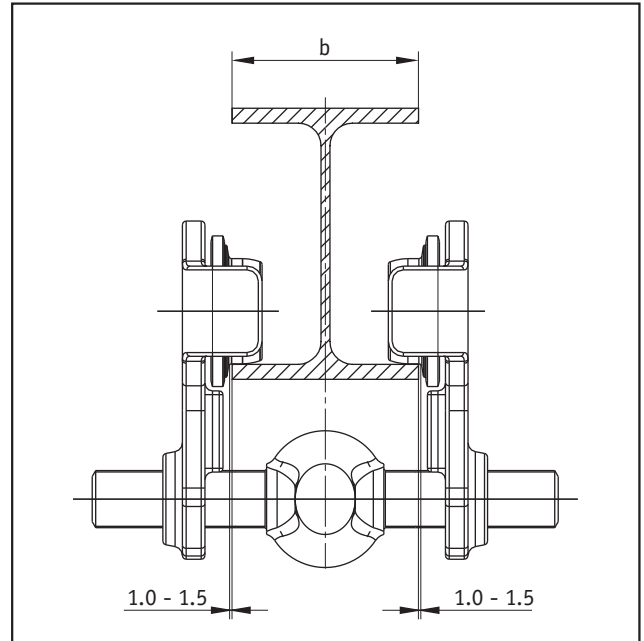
Correct position of clevis load bar and clearance of wheel flanges
